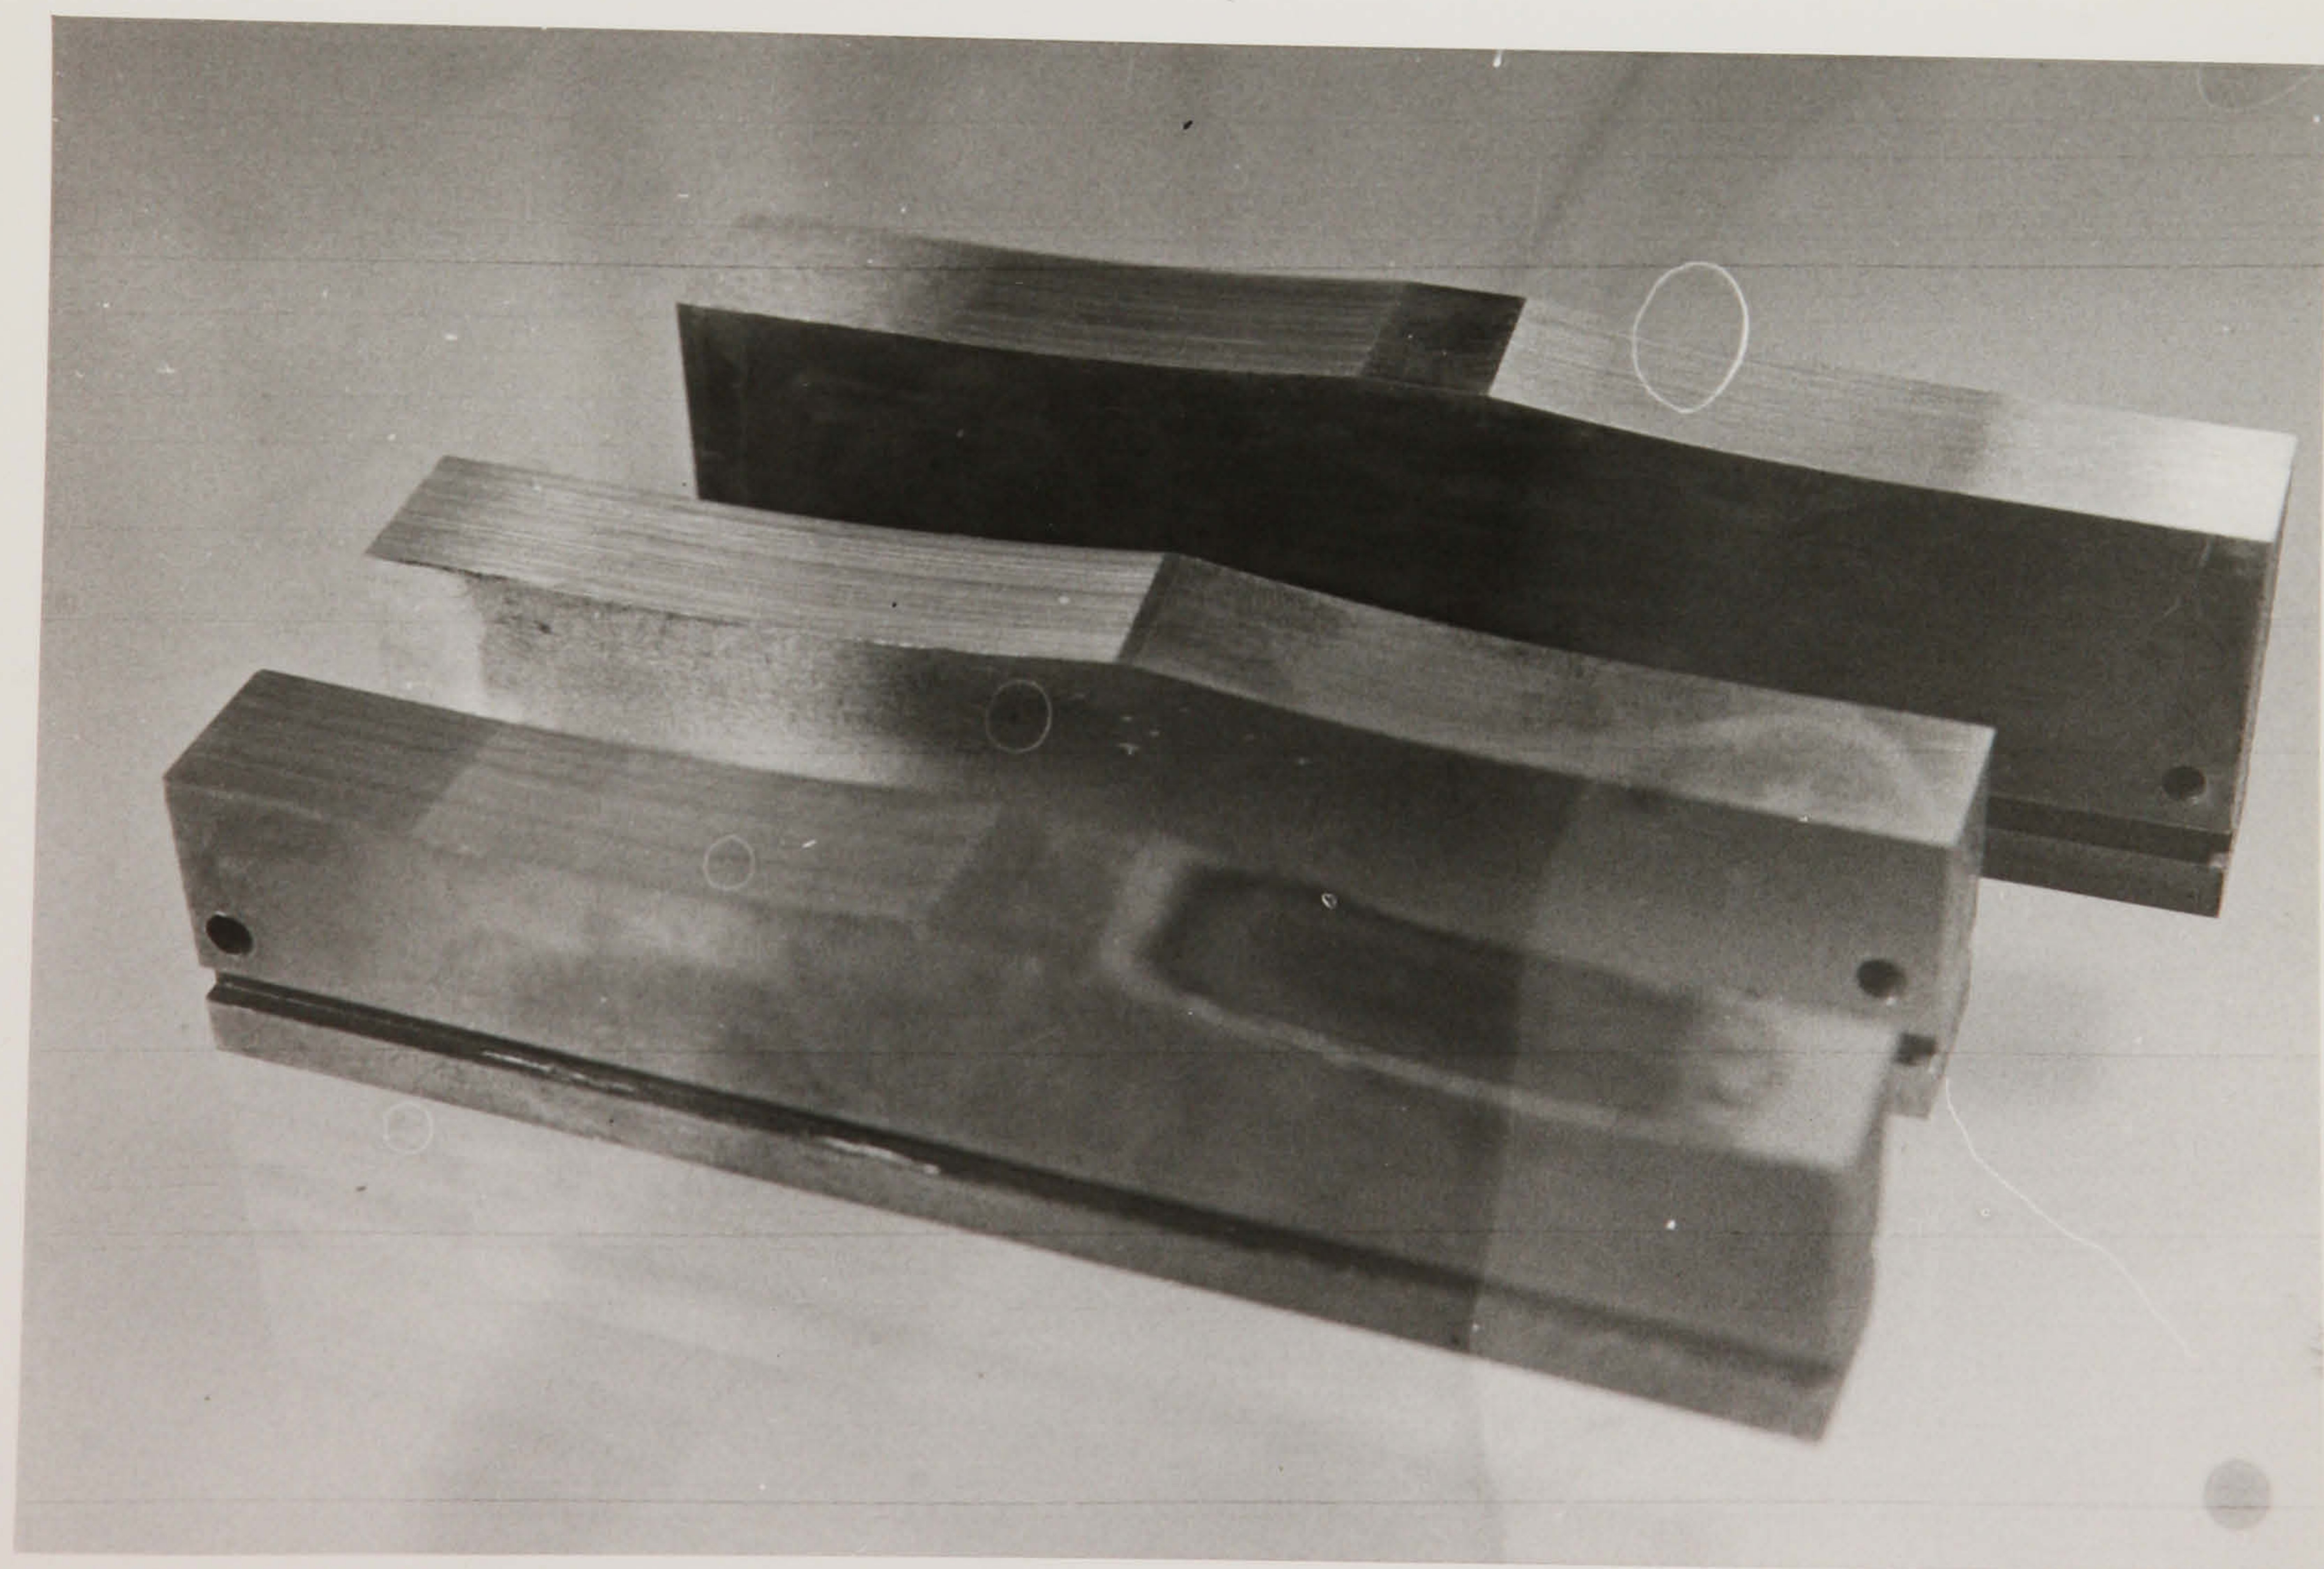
SURFACE GRINDING SPECIMENS (THE
